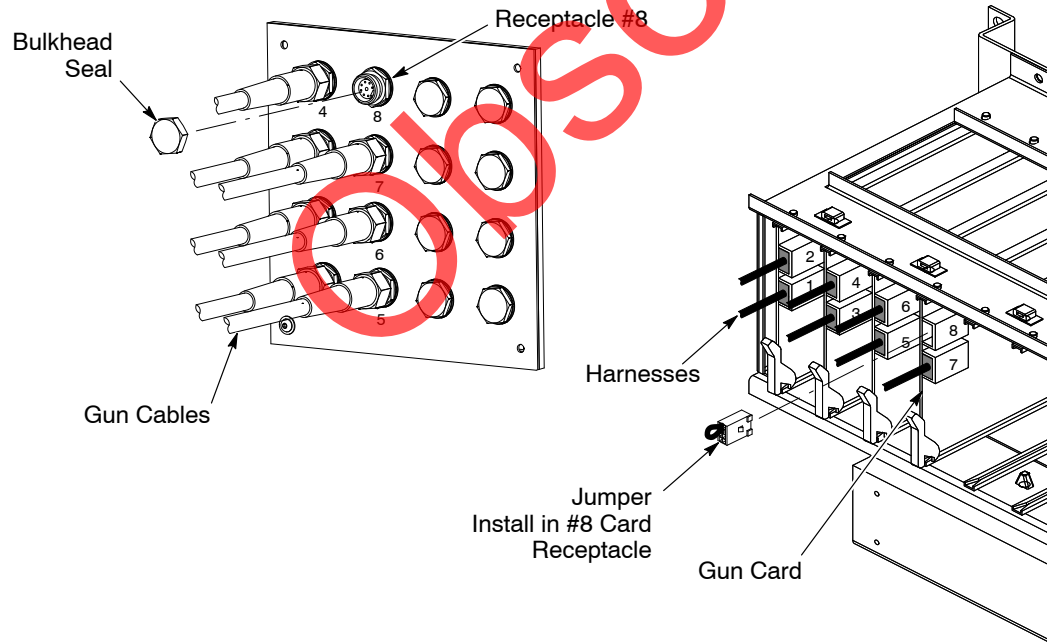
Seal and Jumper Installation – Example Showing 8 Gun System Using 7 Guns
